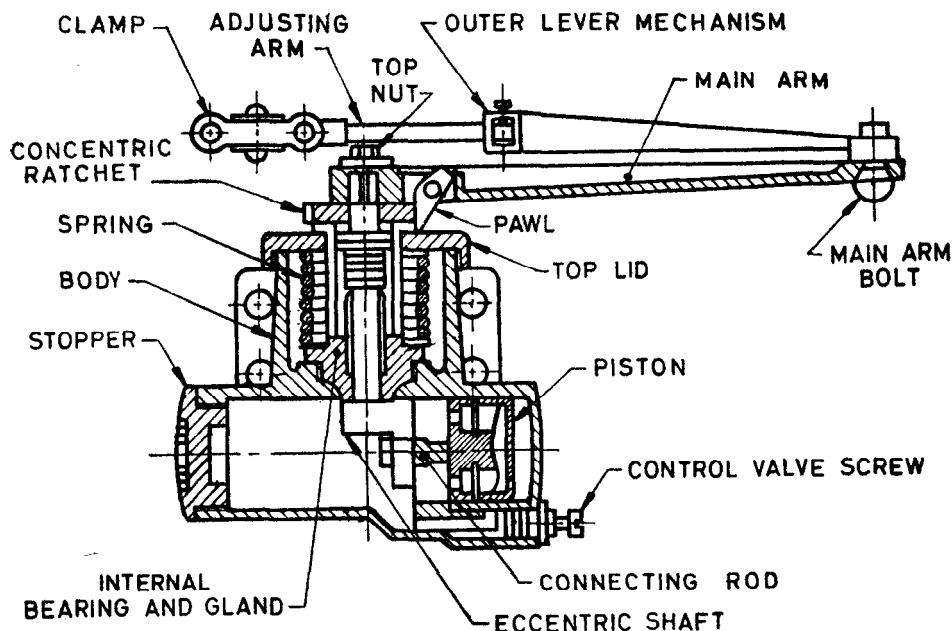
TYPICAL SKETCH OF HYDRAULIC DOOR CLOSER SHOWING MAIN COMPONENTS
